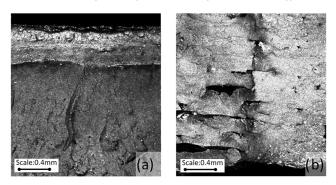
and 11 illustrate sample fractures obtained during impact tests. There were significant differences in the topography of the analysed fractures resulting from the manufacturing technologies applied (Figure 10). The injection moulding mould fracture is characterised by a flat surface, which indicates a brittle fracture in the impact load test [Figure 10(a)]. The noticeable colour change at the top of the fracture is because of the appearance of plastic
